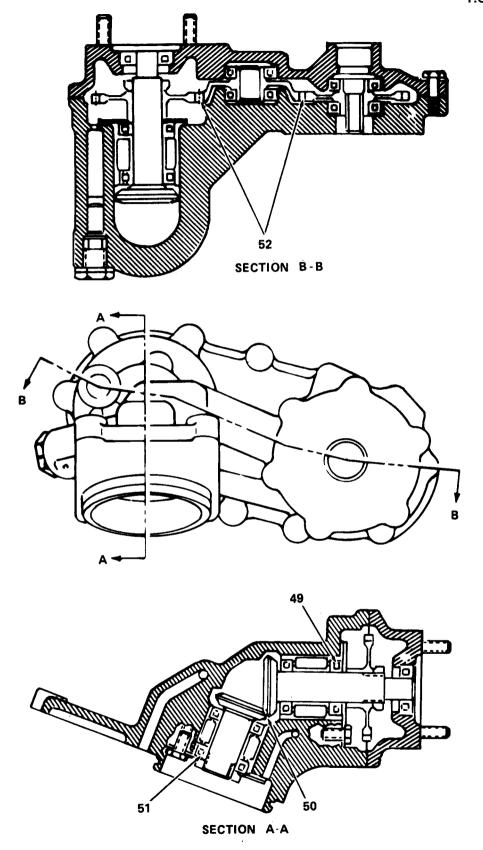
Fits, Clearances and Backlashes (T53-L-11 Series Engines) (Sheet 5 of 5)
